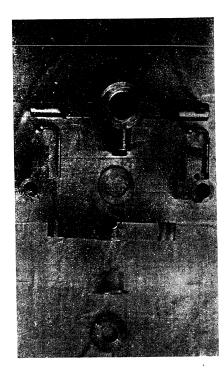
THE BOTTOM CARRIAGE PARTS — View
